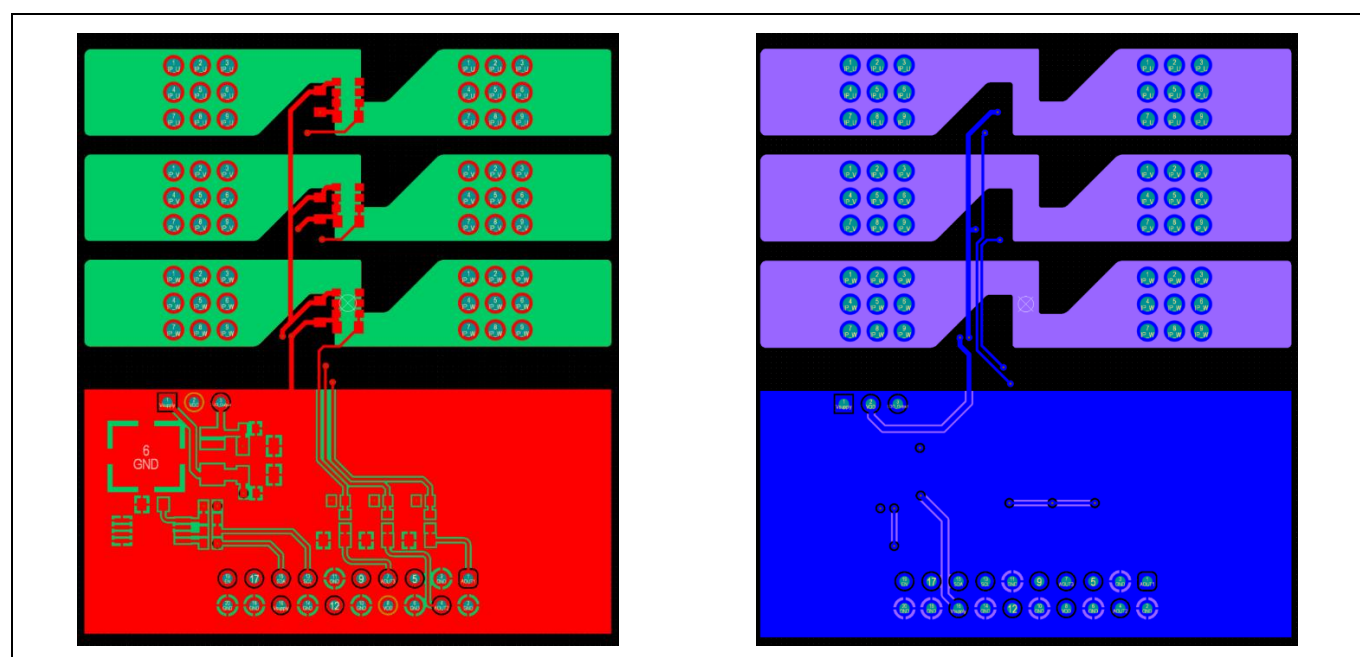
Evaluation board PCB layout: External current rails (green on layer 2, purple on layer 1), top layer (left, red) and bottom layer (right, blue).
